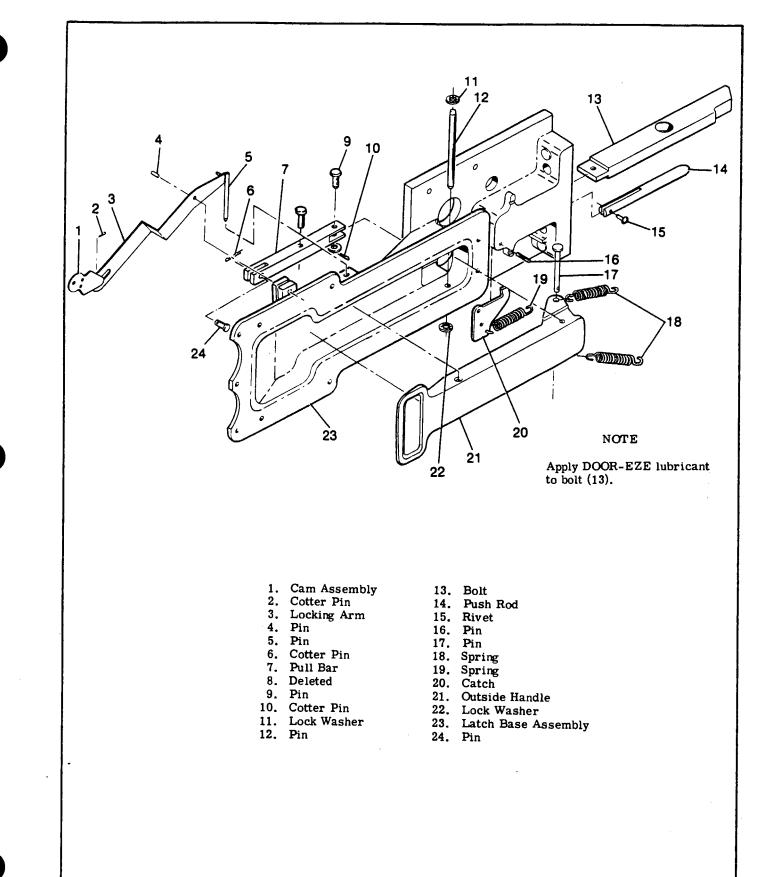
Cabin Door and Latch Assembly (Sheet 1 of 3)
